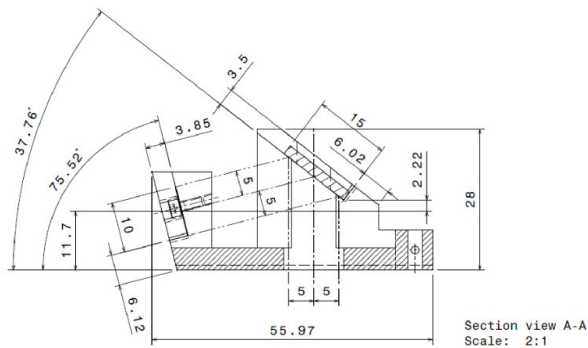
Mechanical drawing of the view screen vacuum assembly that hosts the YAG:Ce scintillator and the vacuum mirror.
